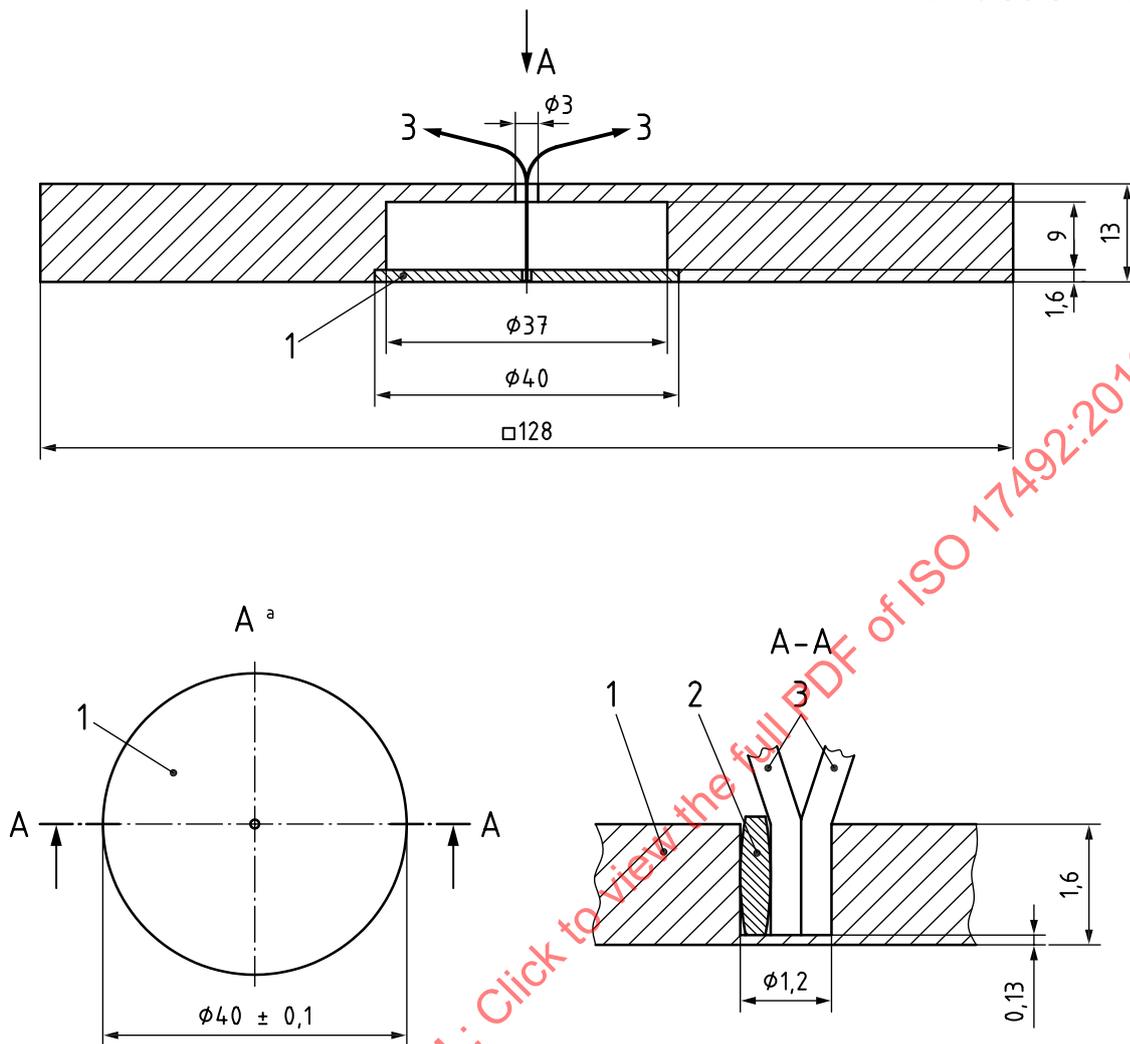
Details of specimen mounting plate (bottom left), specimen holder plate (bottom right) and spacer (top centre)
